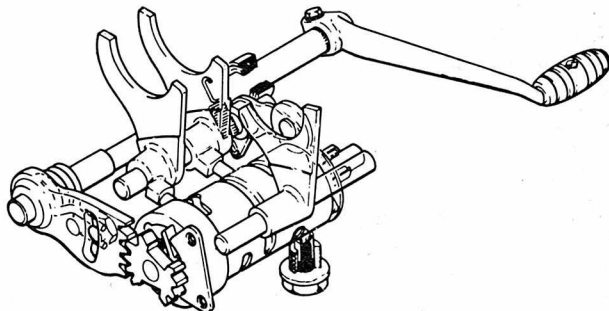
Exploded view of transmission used in TM 400 R models. Unit should be assembled in left crankcase half.
